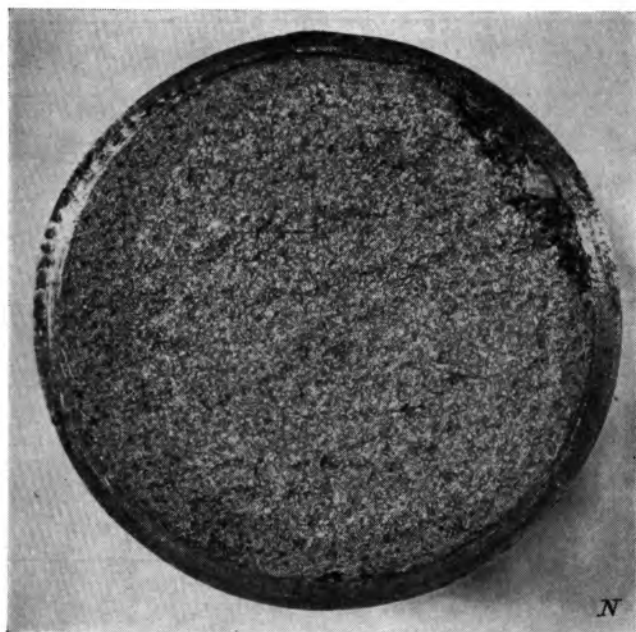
FRACTURE SURFACES FROM PURE TENSION
